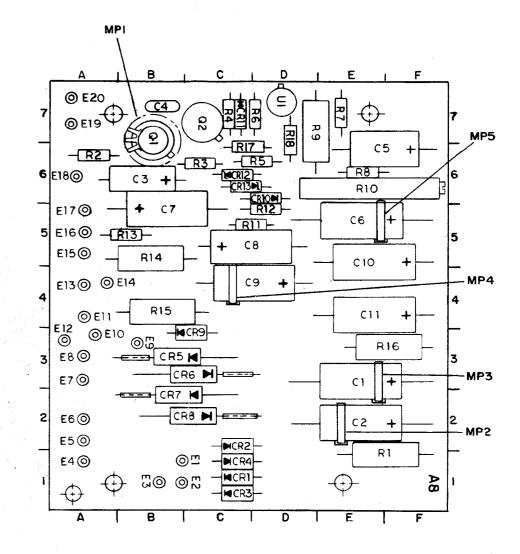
Power Supply Assembly A2A8, Component Locations
